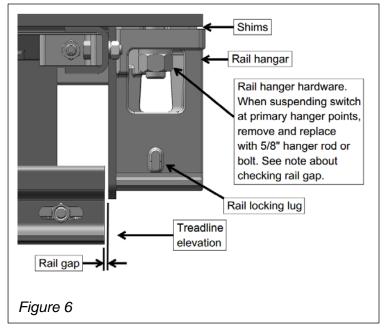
typical rail hanger with hardware. Remove hardware when substituting hanger rods or bolts at these locations. Place large flat washer (by others) over countersunk hole in switch top plate.
